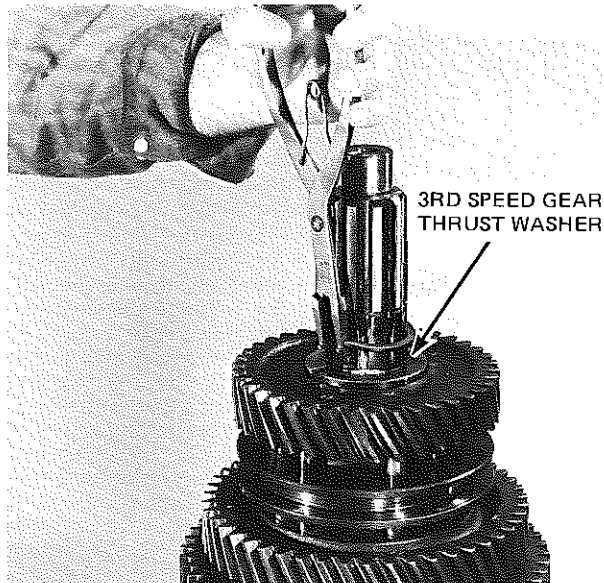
Assembling 3rd Speed Gear Snap Ring
